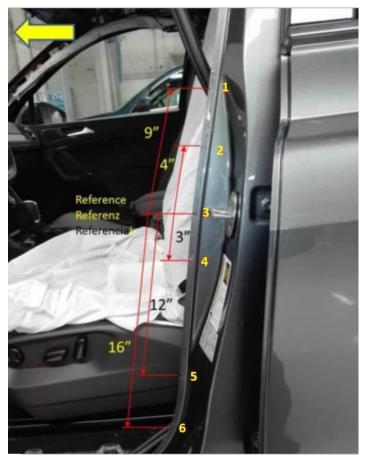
Sequence, bend back and forth on the metal panel of the front door frame, use the striker as the reference point.
